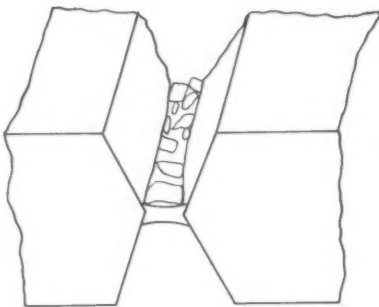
Appearance of the underside of the weld illustrated in Fig. 6, showing the effect of the copper backing bar. The concave areas make an ideal surface for receiving other weld beads.
